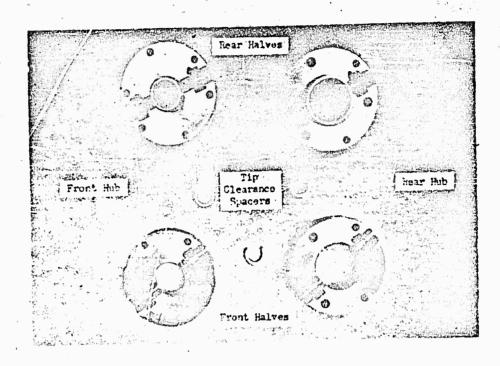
FIGURE Co: THREE-PLADED PROFELLER HUP ASSEMBLIES
